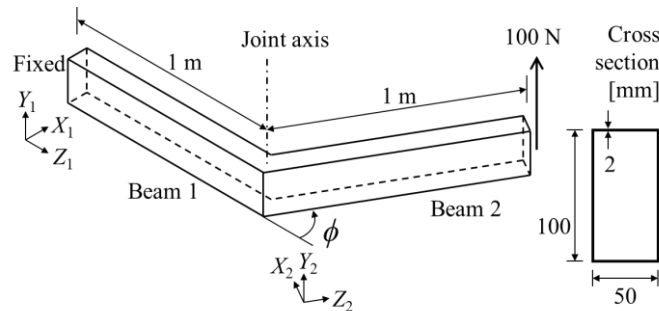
L-type joint structure with a rectangular section subjected to a vertical force.
